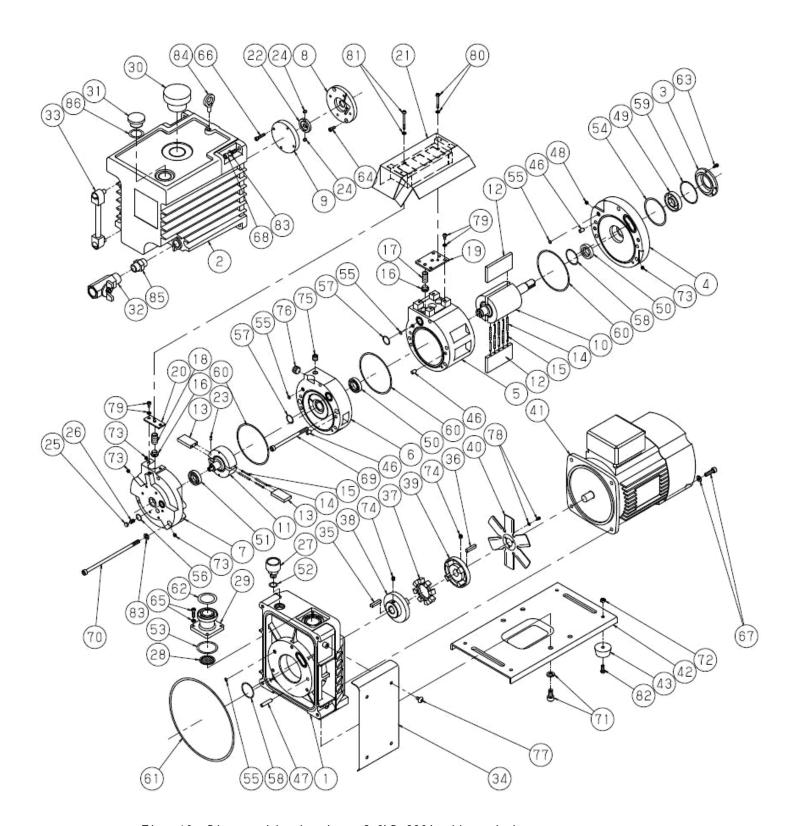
Disassembly drawing of GLD-280A oil sealed rotary vacuum pump
